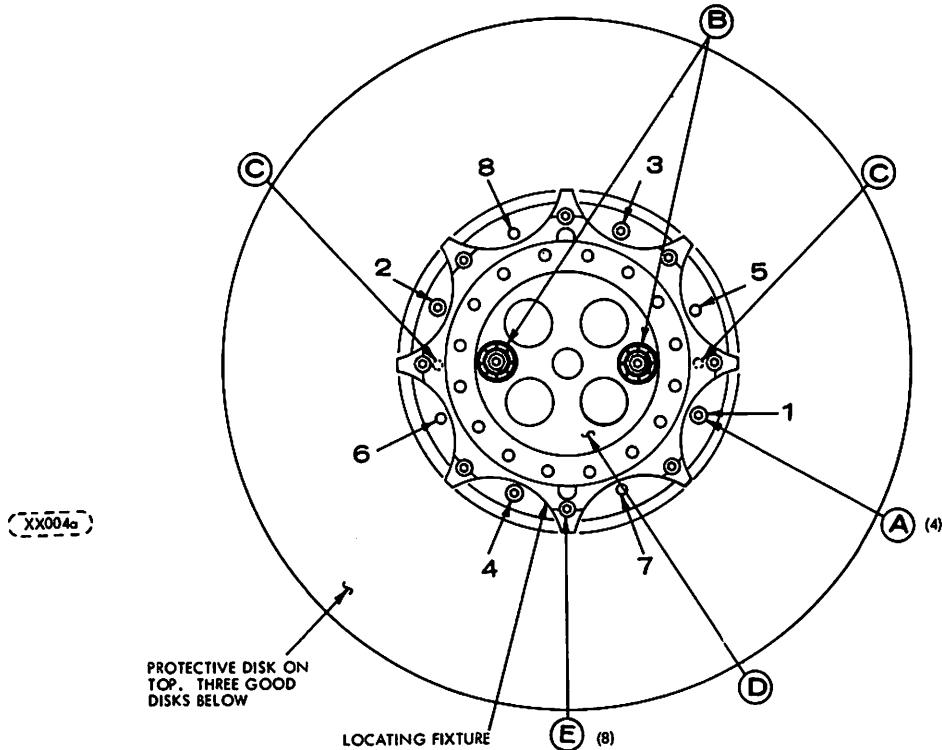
FIXED DISK PACK LOCATING FIXTURE AND PROTECTIVE DISK
